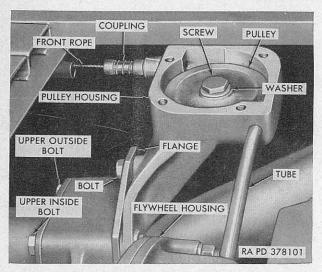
Starter rope pulley housing—cover removed showing pulley.
